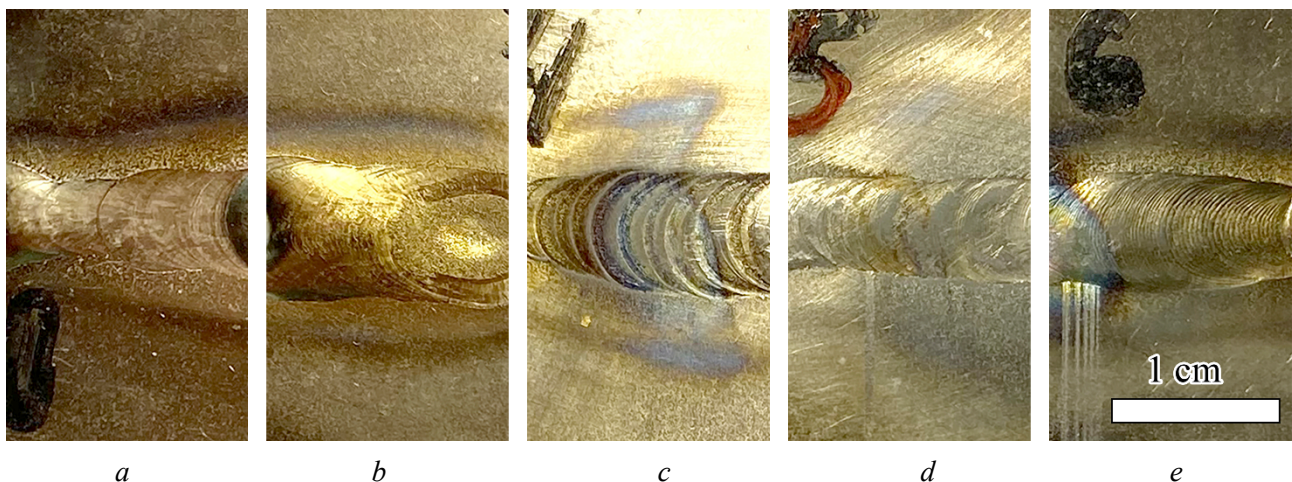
Appearance of *Ti–Al–Nb–(Zr, Mo)–Si* alloy weld joints produced by *GTAW* under:
